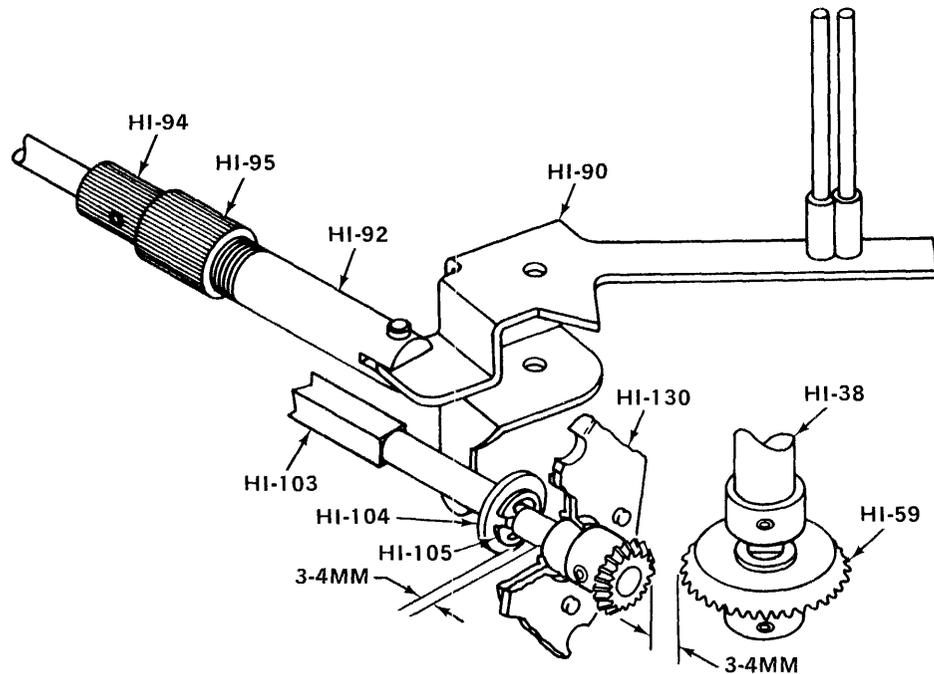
DRIVING SLIDE SHAFT A - ADJUSTMENT
